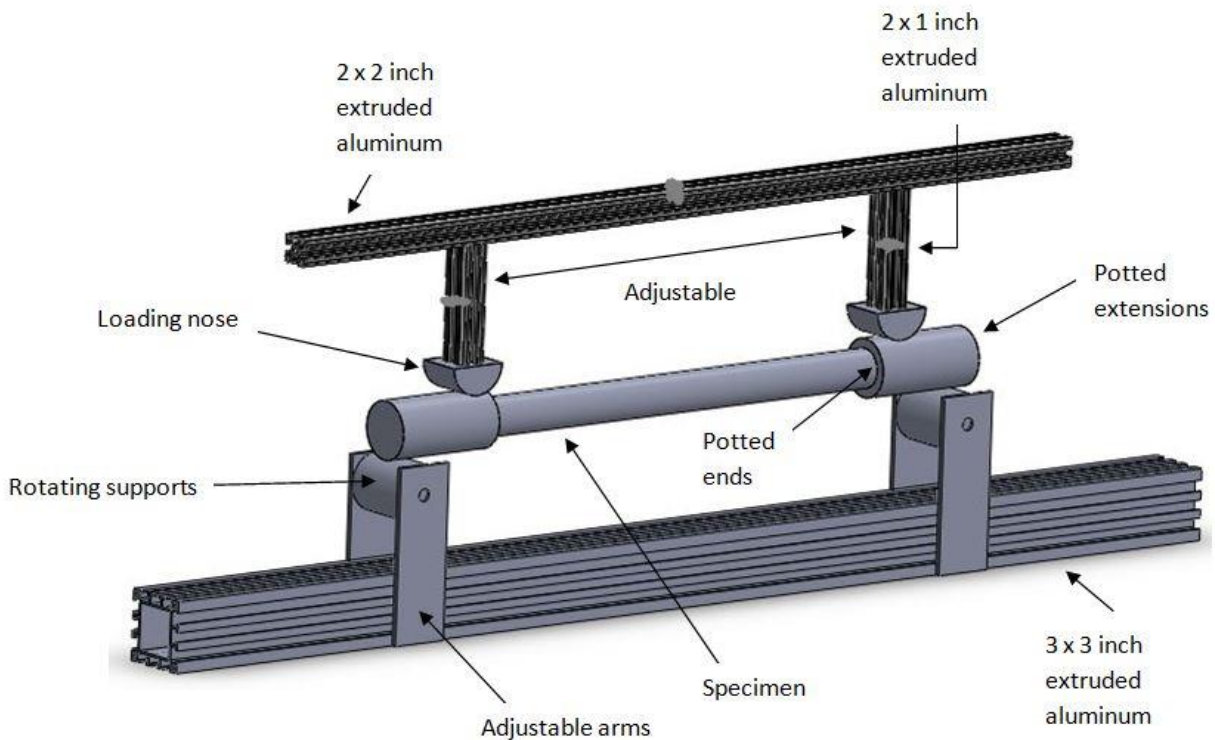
3D Model of the Assembled Pure Moment Fixture with an illustration of a specimen
